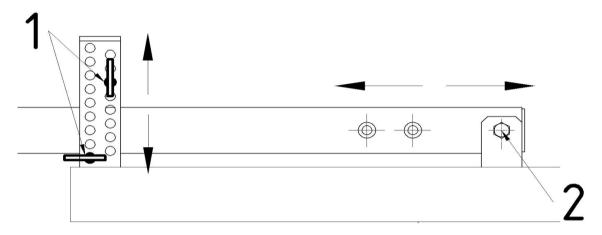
Adjusting the depth and distance of the tubular shaft: 1 - working depth adjustment pins with stabilising plate; 2 - shaft arm fixing screw.
